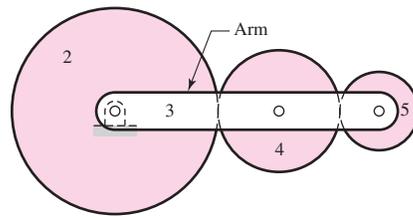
shows a planetary train composed of a sun gear 2, an arm or carrier 3, and planet gears 4 and 5. The angular velocity of gear 2 relative to the arm in rev/min is
